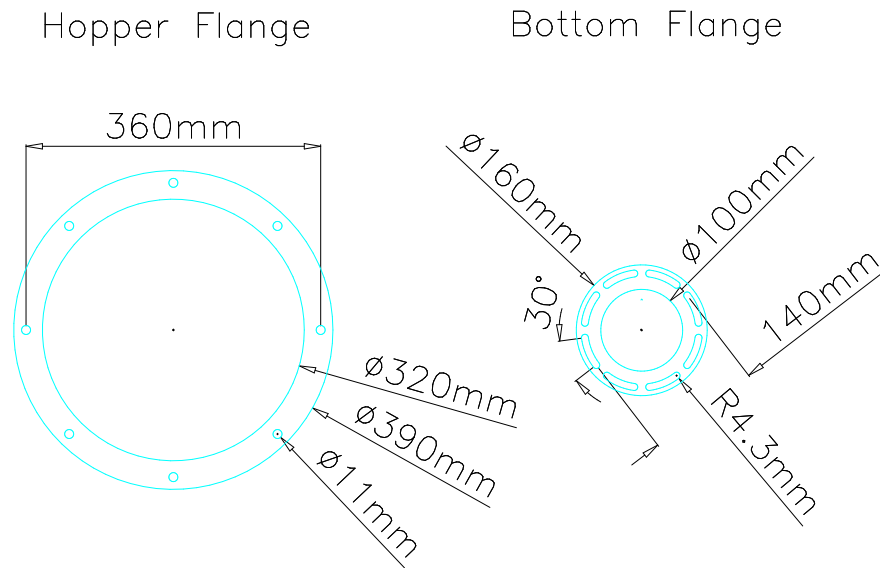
Hopper and Bottom Flanges for CD400/CD800
